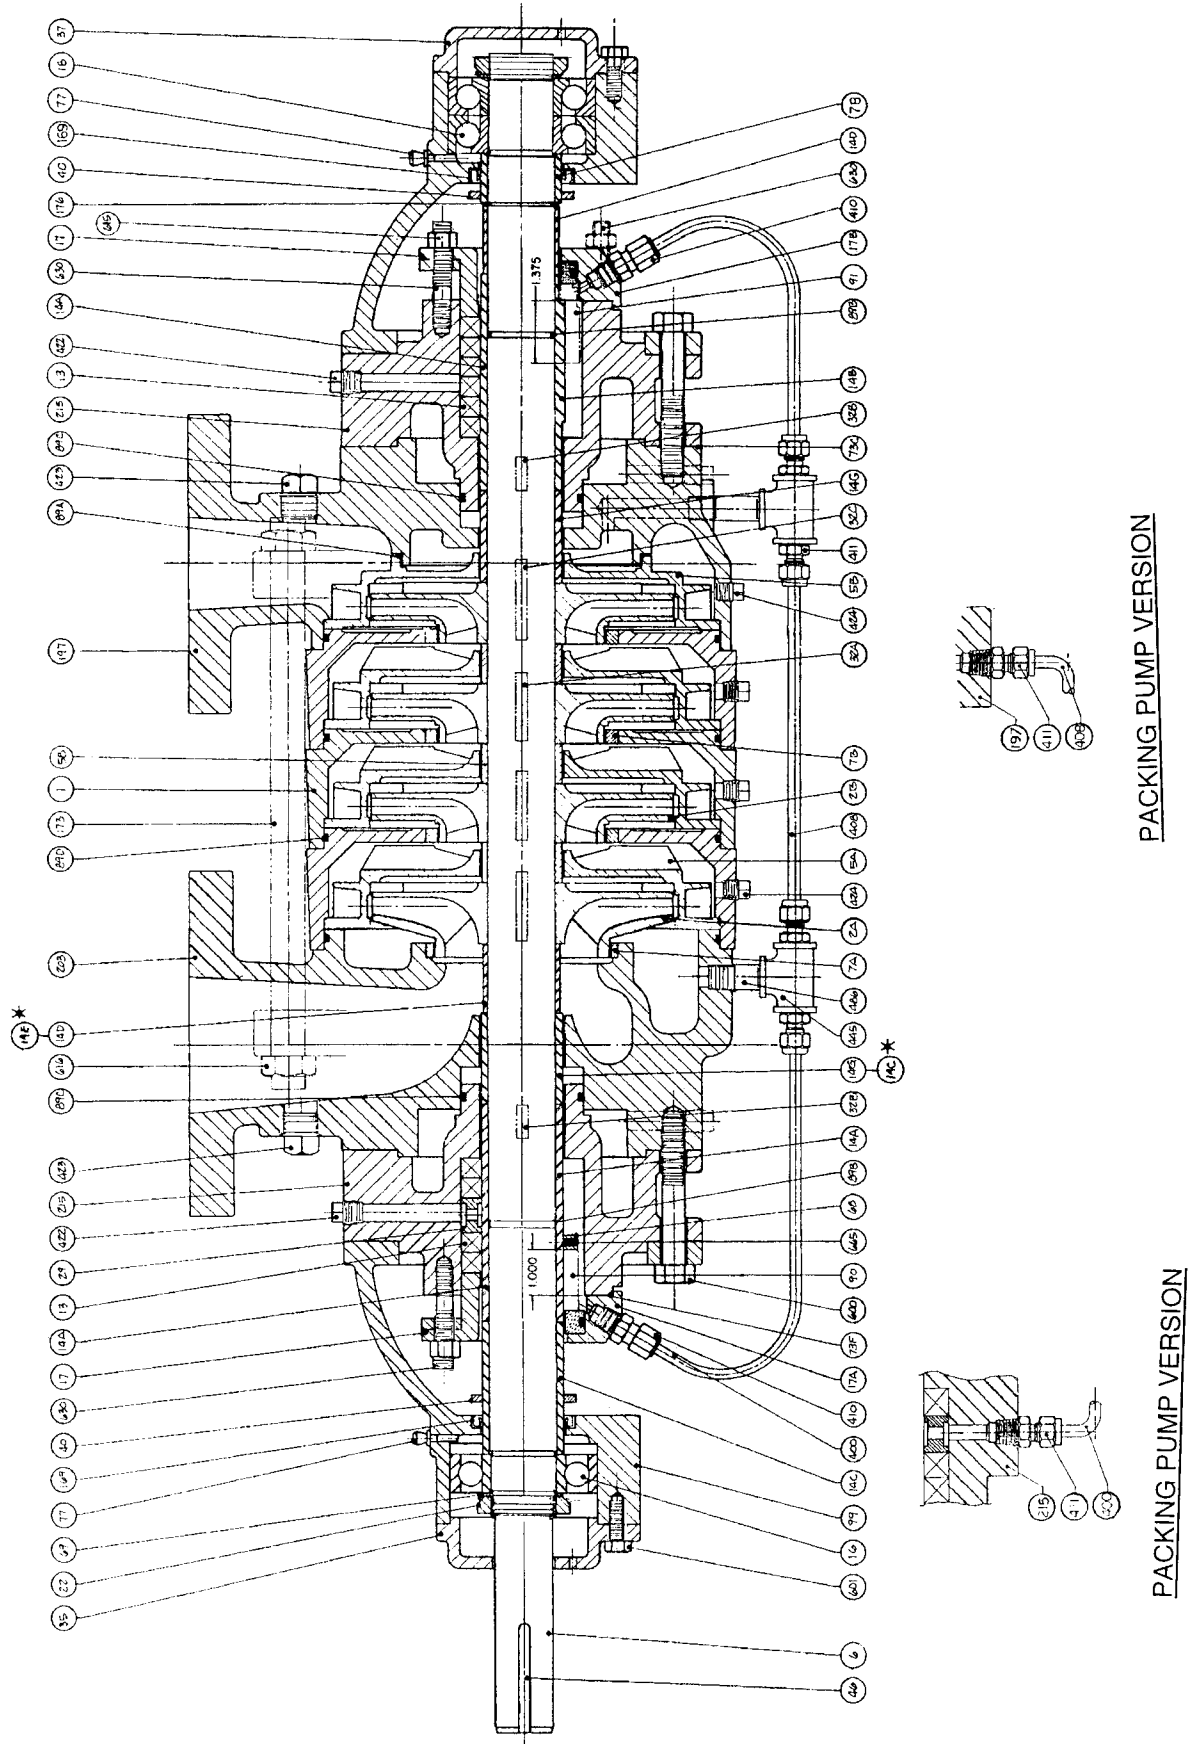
Model WKL-50 and Model WKL-65 Hot Service Sectional Drawing
